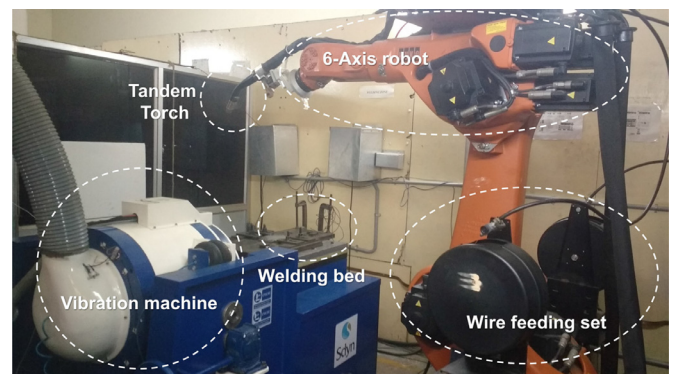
The welding equipment and supplementary vibration machine.
